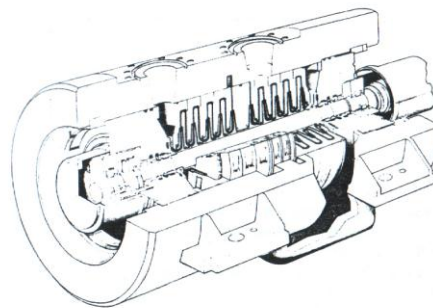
Cutaway of a vertically split centrifugal compressor. Photo courtesy of Dresser Clark Division, Dresser Industries, Inc., Olean, NY.
